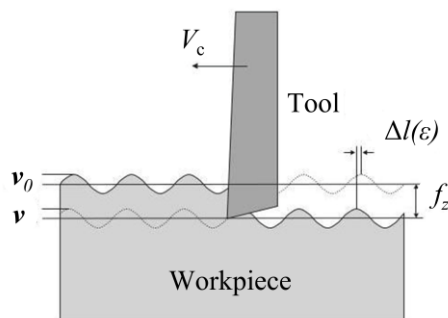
Wavy surface of workpiece in orthogonal cutting
